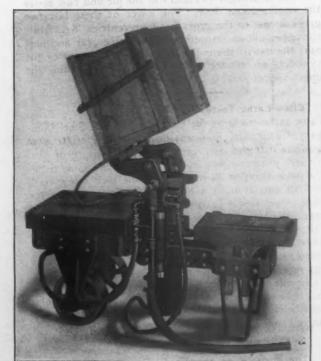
View of Machine While the Flask Is Being Rocked Over,
